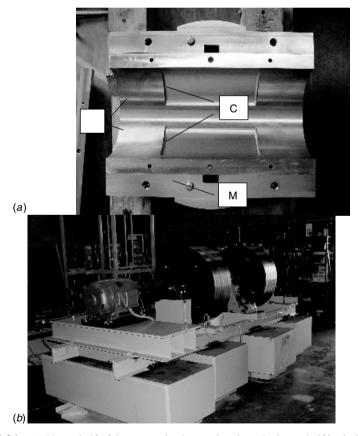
(a) Upper half of the pressurized water bearing (the lower half is similar). Note the hydrostatic pockets, orifice locations, and pressurized water manifold. (b) Bearing test stand in Minden, Nev.
